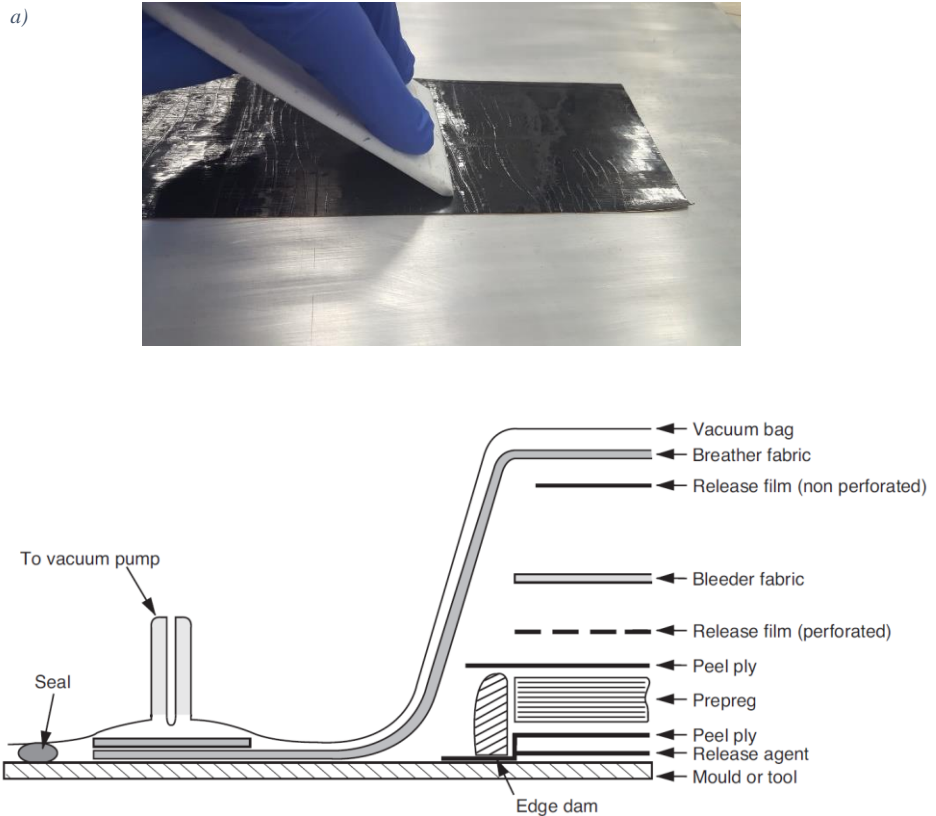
a) Dibber tool for air removal and b) vacuum bag set-up (figure from [14])
